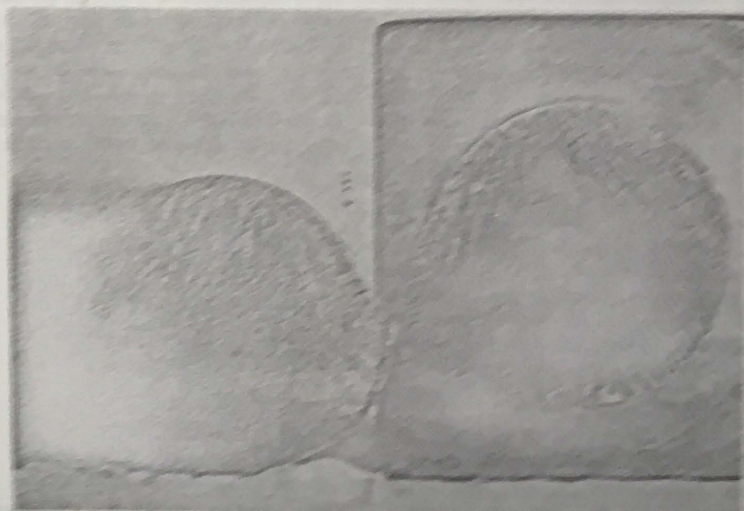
Valve Stem Failure by Hydrogen-Stress Cracking.
